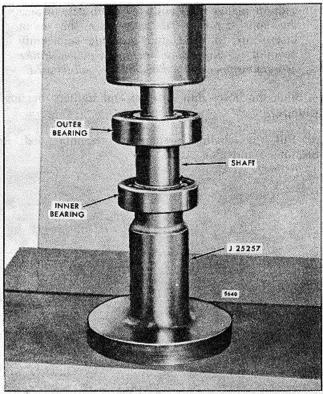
Pressing bearing on Hump Shaft using Tool J 25257
